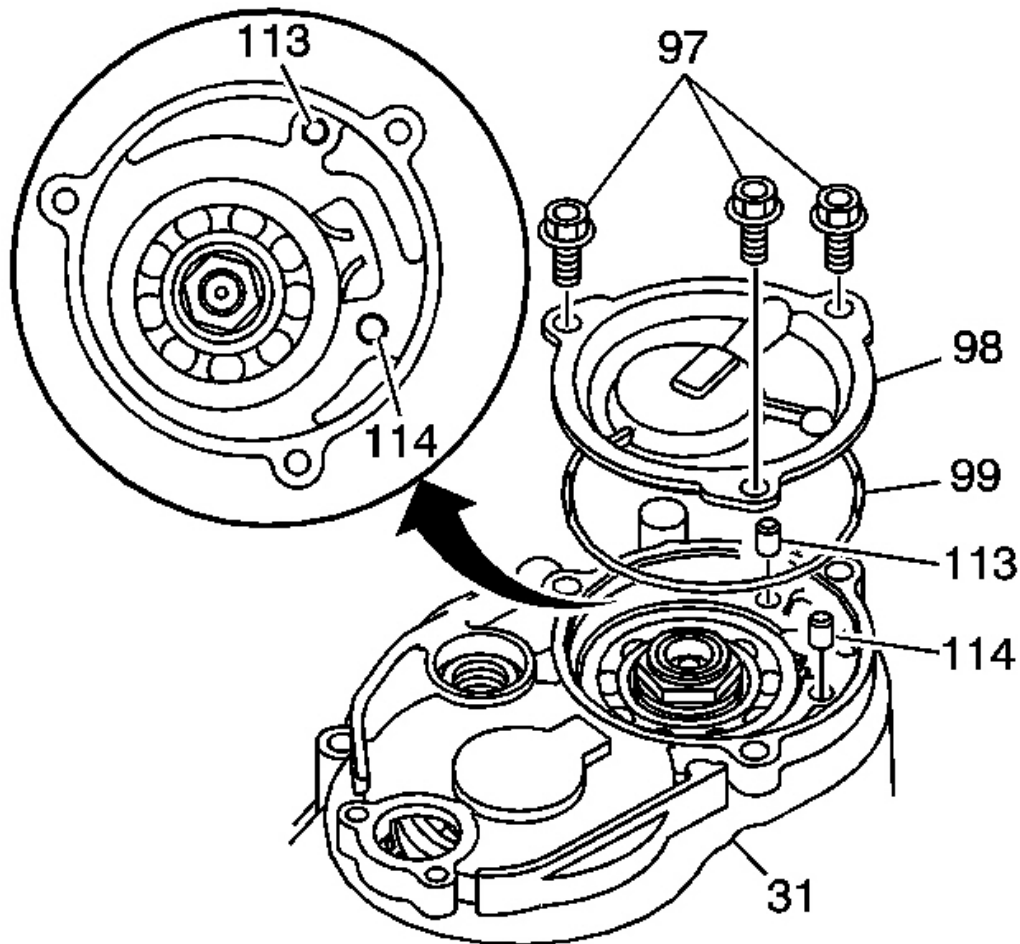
Mainshaft Rear Case Cover Locating Pin, O-Ring Seal & Transfer Tube
